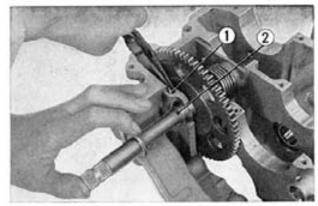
(i) Kick starter shaft stopper pin (2) Kick starter shaft
